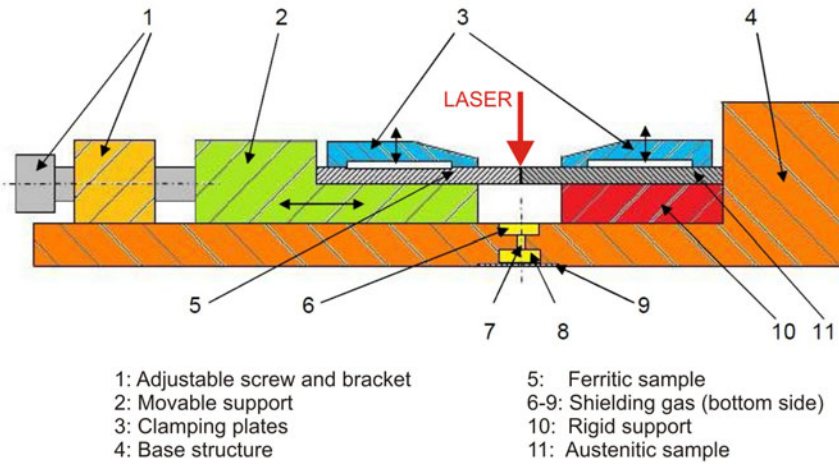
Clamping device for the experimental welding trials [Bavarian Laser Centre].
